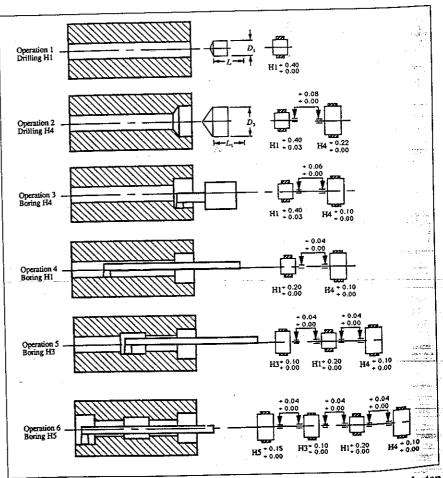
Operation sequence 2 and the machining tolerances produced at each step.
